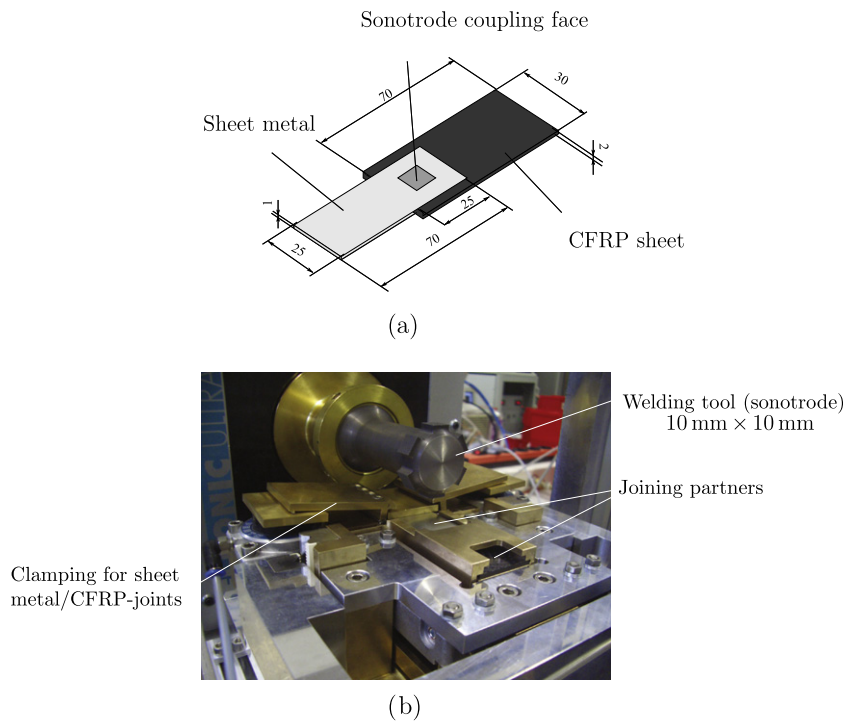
(a) Specimen geometry (square interface), (b) ultrasonic spot welding system.
